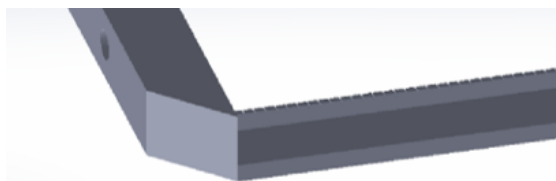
SolidWorks image of a section of frame. Note the grooves for wire placement, the flat region to hold the circuit board, and the hole for gas flow.
